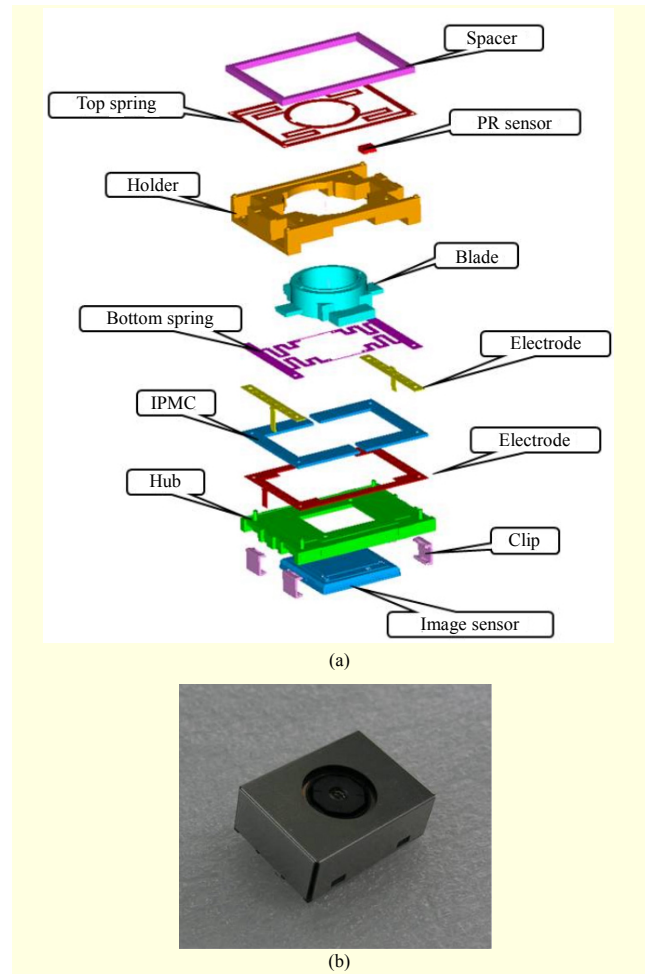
(a) Detailed parts of a compact camera module containing IPMCs as a lens-drive unit and (b) an assembled compact camera module.
